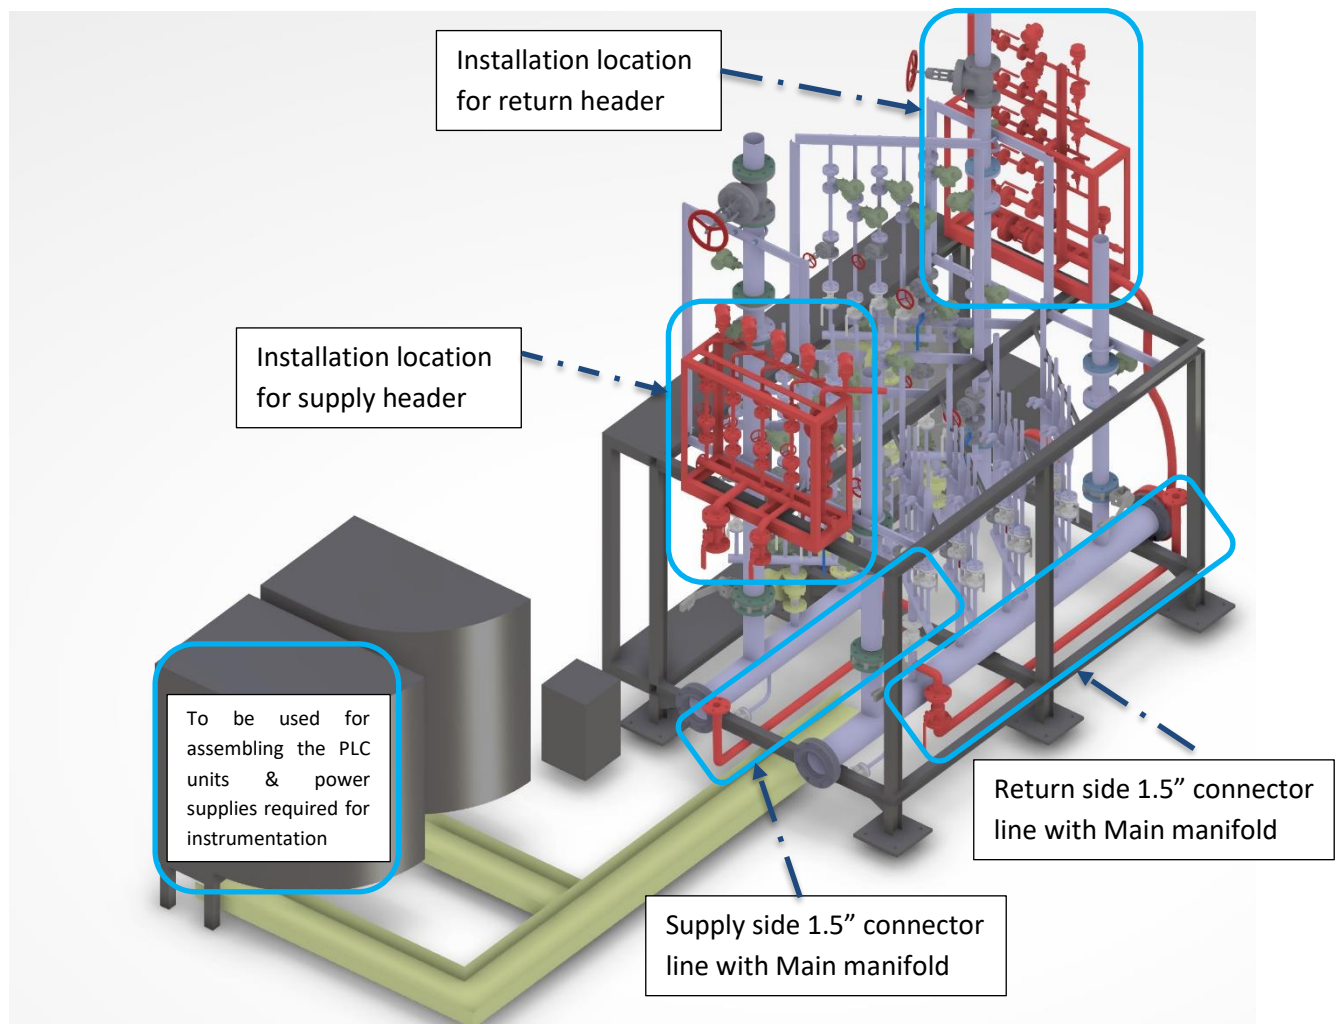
Integrated view of fabricated cooling channels (mini cooling manifold) with Cooling Manifold
